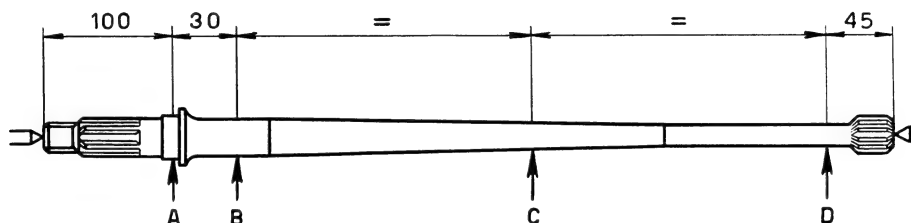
Diagram for runout inspection of axle shafts.
